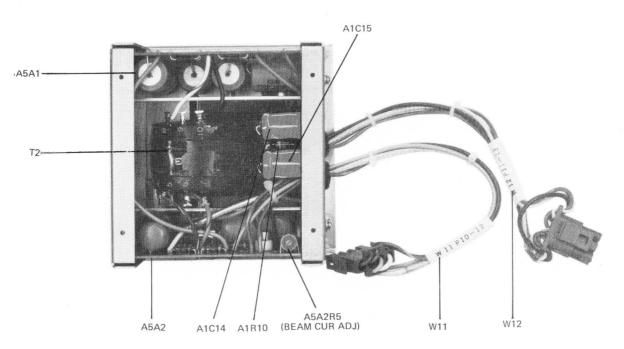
High Voltage Box Assembly A5, Component Layout
